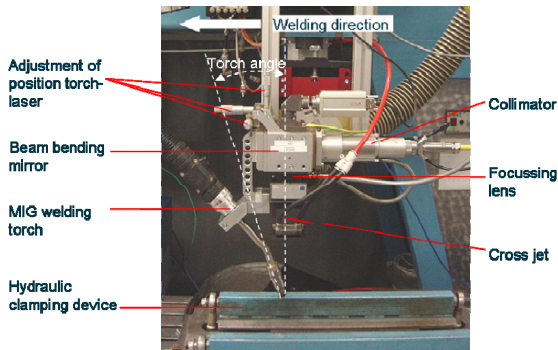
Experimental set-up for laser-GMA-hybrid welding with 8 kW
